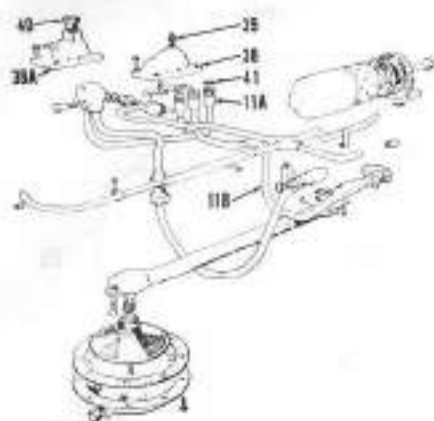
View showing hydraulic lines and filters for early models 880 and 990. On model 4690 and late models 880 and 990, a full flow filter element (see Fig. 212) is used instead of the by-pass type filter assembly.
